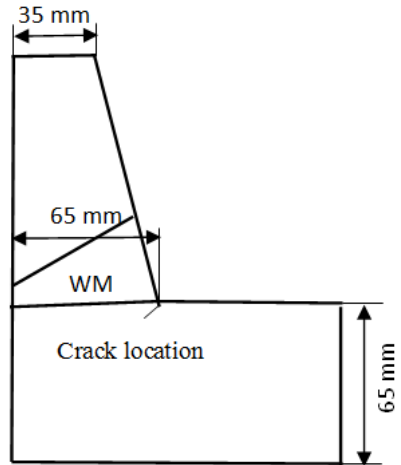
The main dimensions, weld metal and crack positions in a comparable welded component [14]
